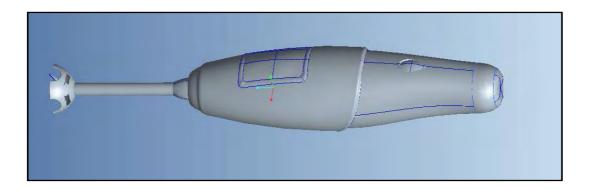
3D CAD models of hand held kitchen blender for injection moulding
